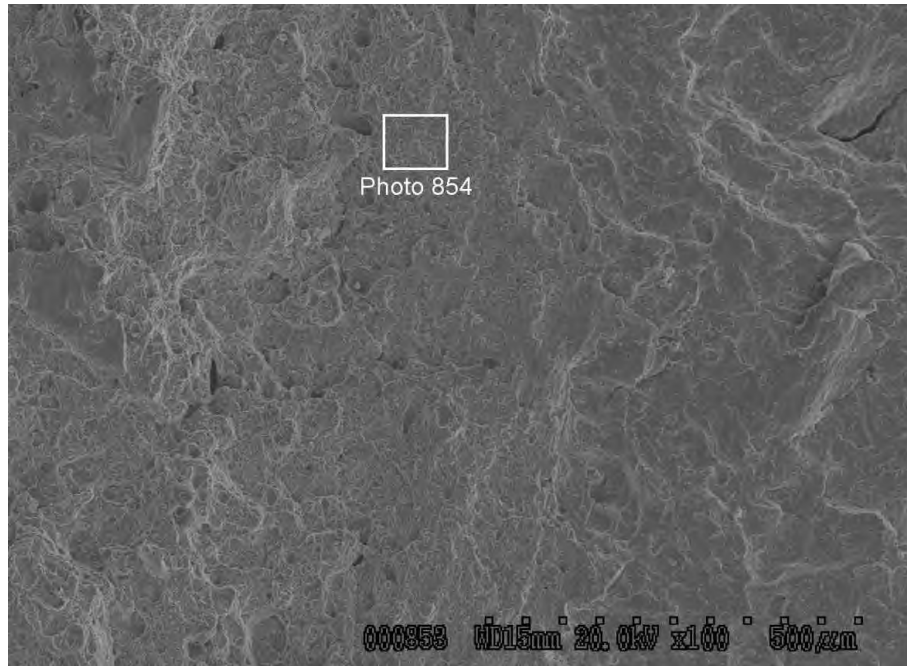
Scanning electron microscope fractograph of blade airfoil fracture surface at Area "853" shown in Fig. 283.
